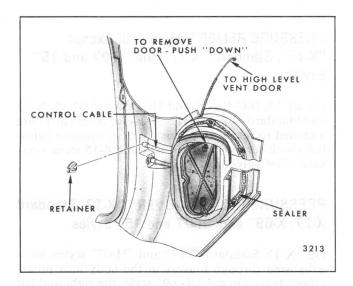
Shroud Side Finishing Panel Sealing - "F-X" Styles Shown - "H" Styles Similar
